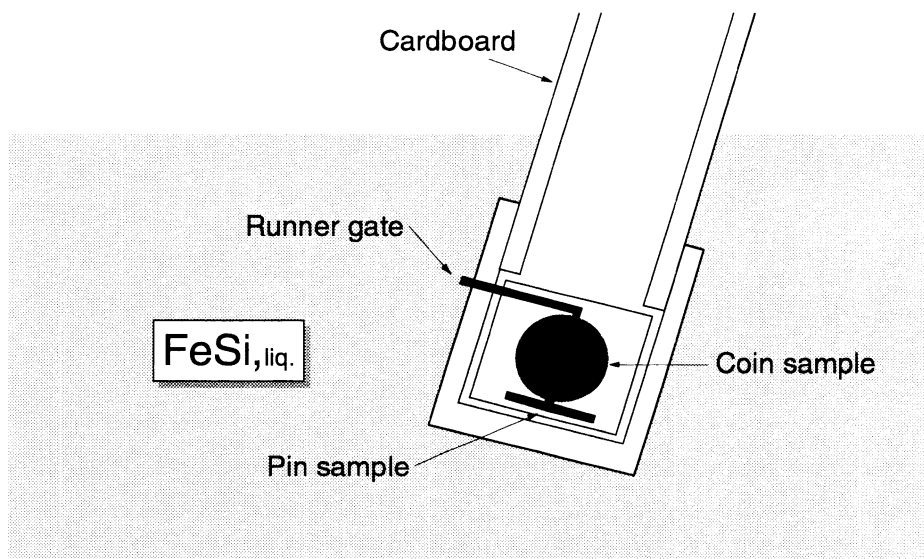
Principle drawing of the MINCO immersion lance sampler [2]
